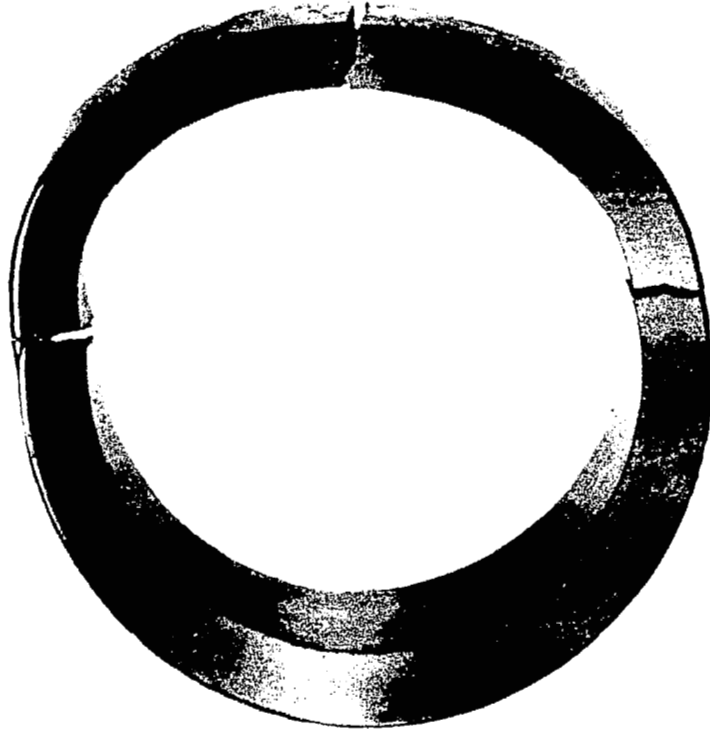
T-111 Tubing from the Metering Valve Inlet Which Cracked as a Result of Flattening After 5000 Hours of Testing in the High Temperature Alkali Metal Valve Loop. (Specimen B - Figure 1) (P70-6-4C)
